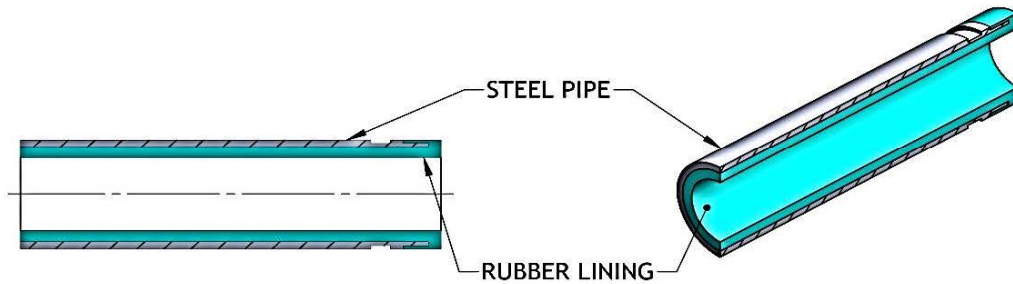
Rubber lining construction for Victaulic pipe (Double grooved pipe for corrosion application)
